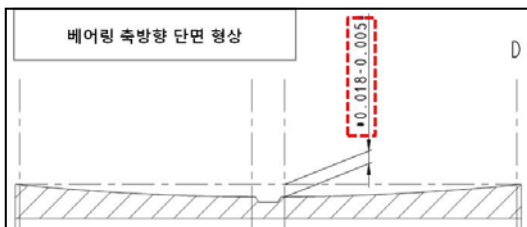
Cross-section shape of anti-Ridge wear bearing shell (lower part)
